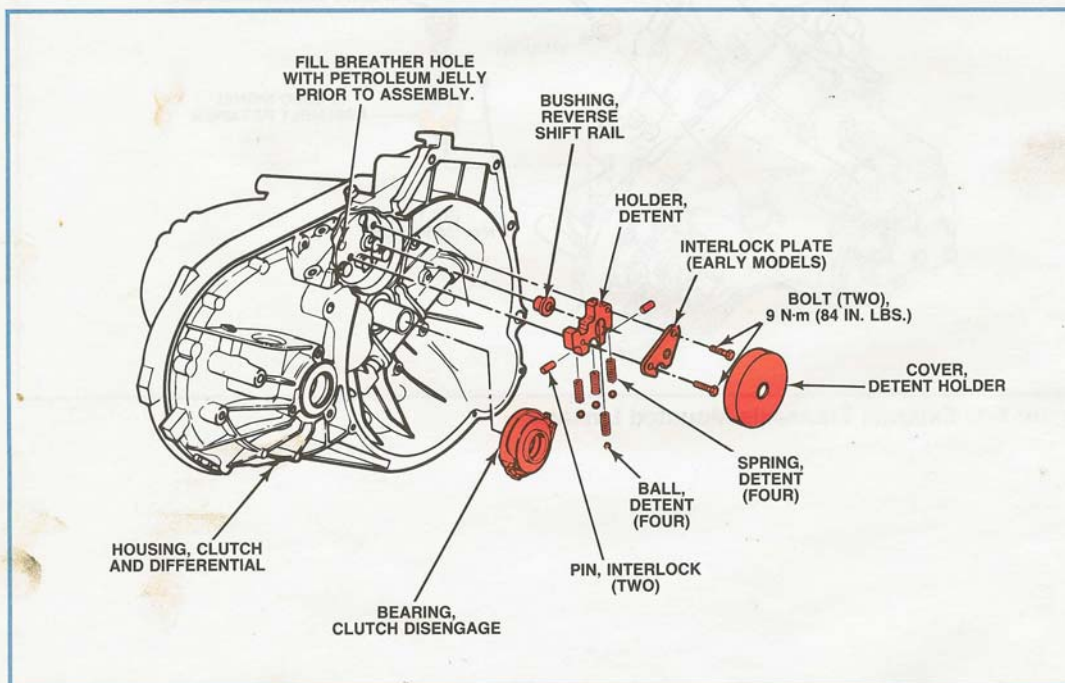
, Shift Control Components/Clutch and Differential Housing.
